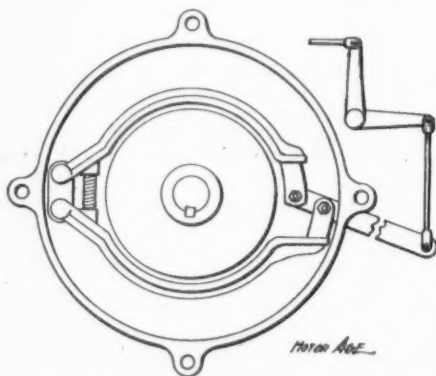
Sectional Side View of Hewitt-Lindstrom Motor Brake.
